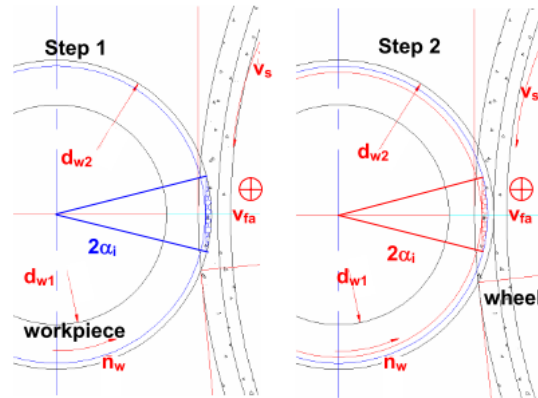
Multi-step grinding strategy (Reprinted from *CIRP Annals- Manufacturing Technology*, 54/2, J. F. G. Oliveira, E. J. Silva, J. J. F. Gomes, F. Klocke, D. Friedrich, *Analysis of Grinding Strategies Applied to Crankshaft Manufacturing*, 269-272, Copyright (2005), with permission from Elsevier).
